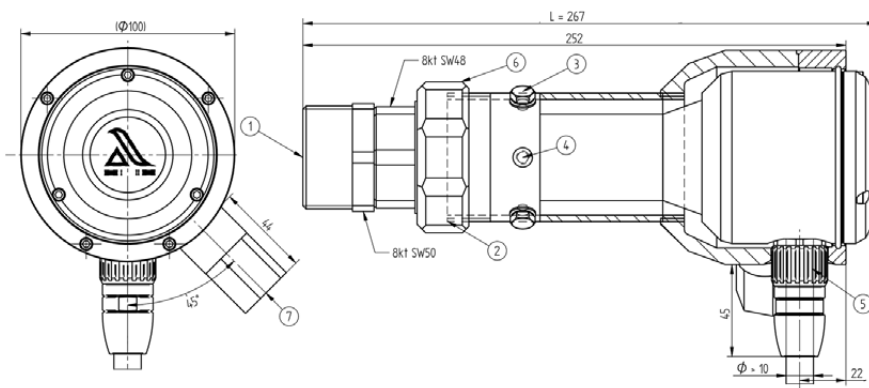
Cooling air housing FS50-2 dimension drawing
